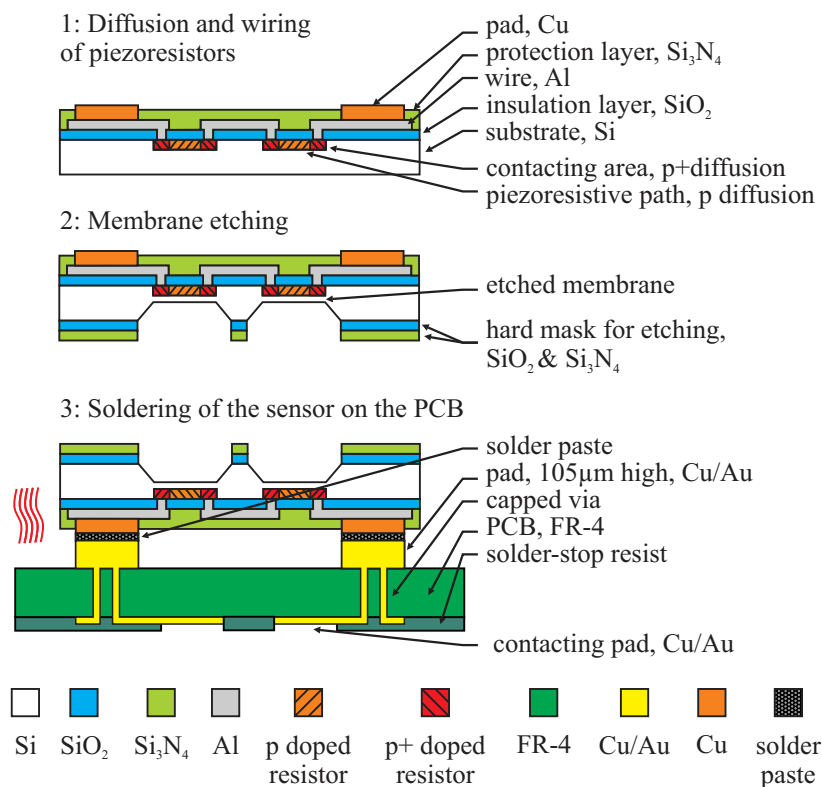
Production of silicon membrane with integrated piezoresistive sensors and compact flip-chip mounting on a PCB.
